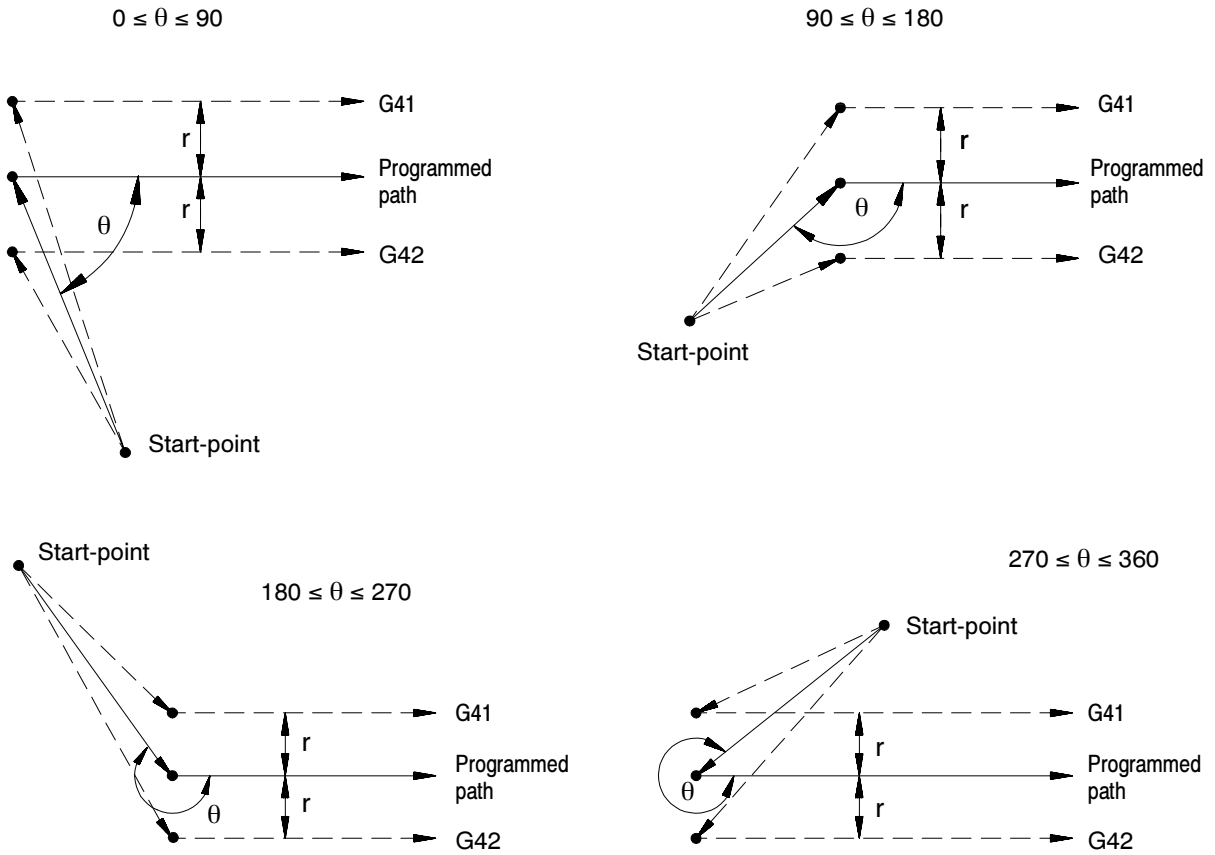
through 20.11 show examples of typical entry moves using type A cutter compensation:
